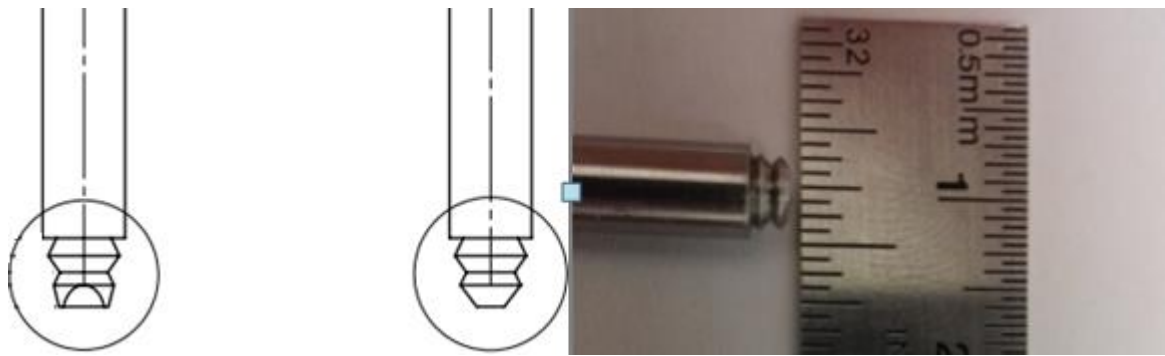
A 5mm probe with two grooves flat surface geometry.
